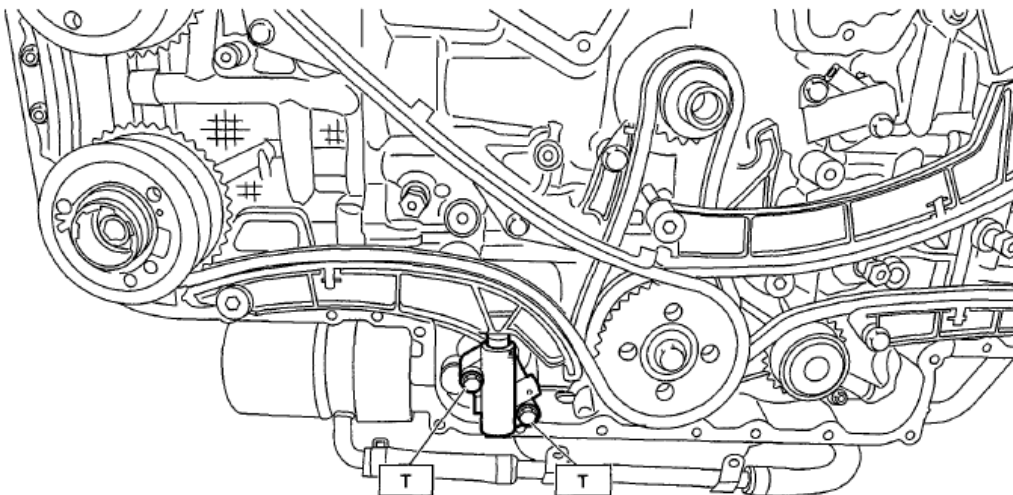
Identifying Chain Tensioner (RH) And Stopper Pin
